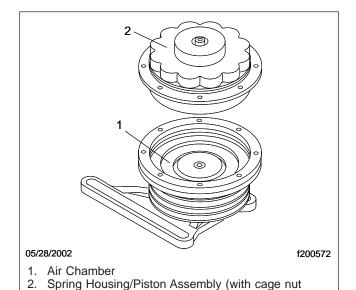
, Spring Housing/Piston Assembly Removal and Installation
